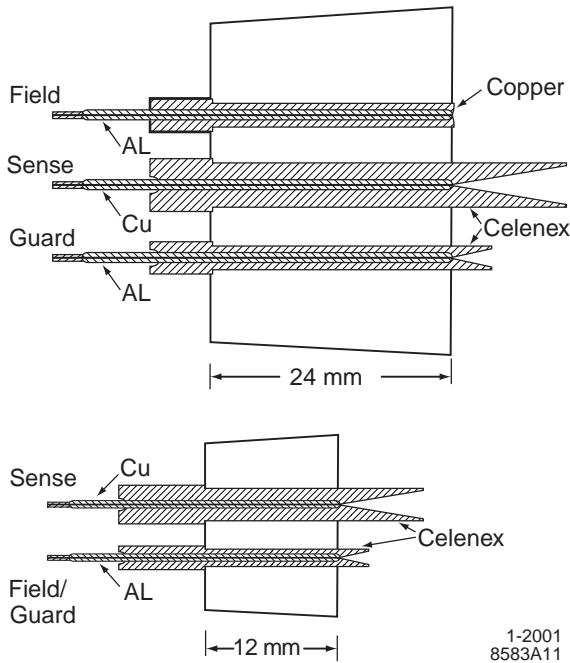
Design of the five wire feed-throughs for the 24 mm-thick endplates and the 12 mm-thick endplate. The copper jacketed feed-through is for grounded field wires, the other four are for sense wires (4.5 mm diameter), and guard and clearing field wires (2.5 mm diameter), all made from a Celenex insulator surrounding the crimp pins.
